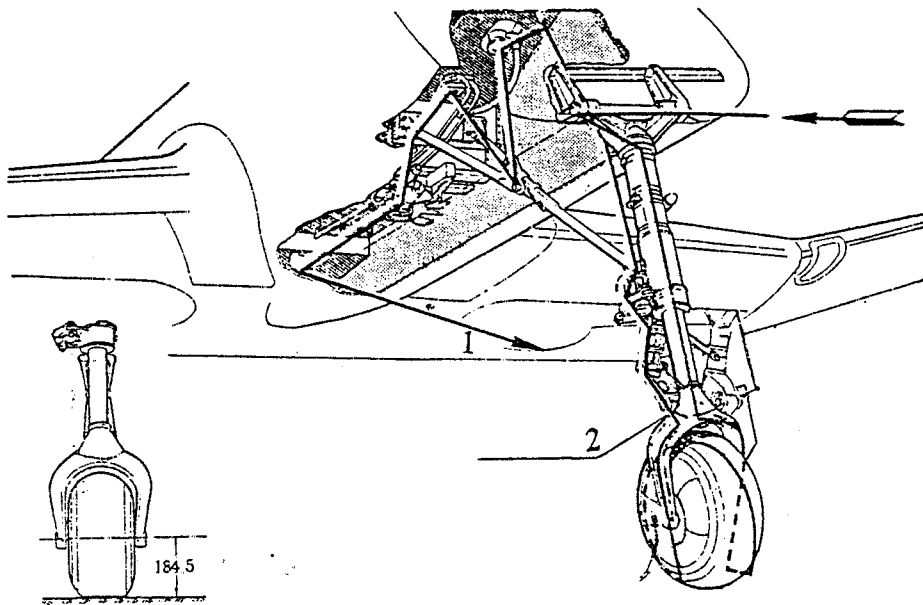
Inspection Circuit for Nose Gear and Nose Gear Bay
